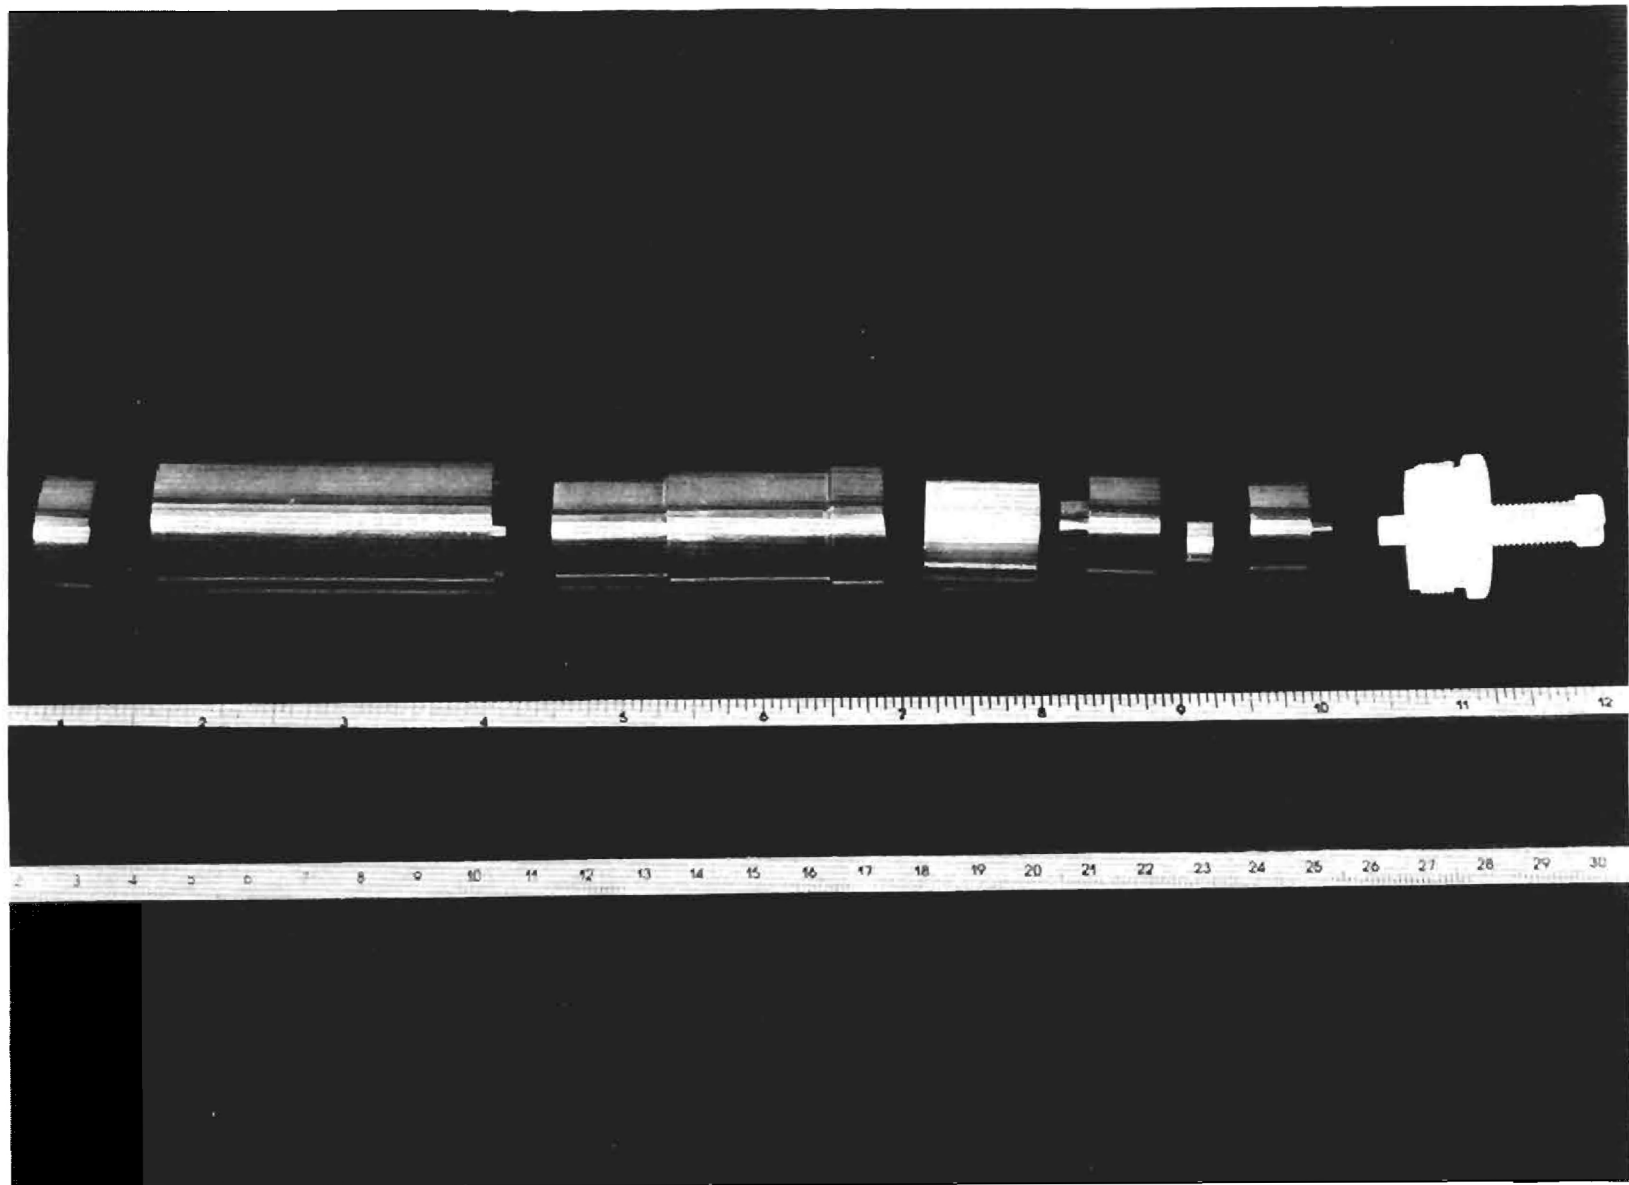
Exploded photographic view of the 6LID irradiation capsule.
